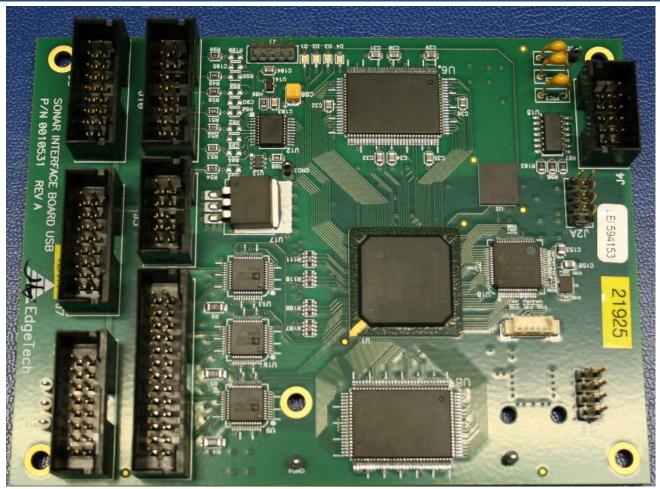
Tiger Board Set: SIBU aka Sonar Interface Board – 0011637
